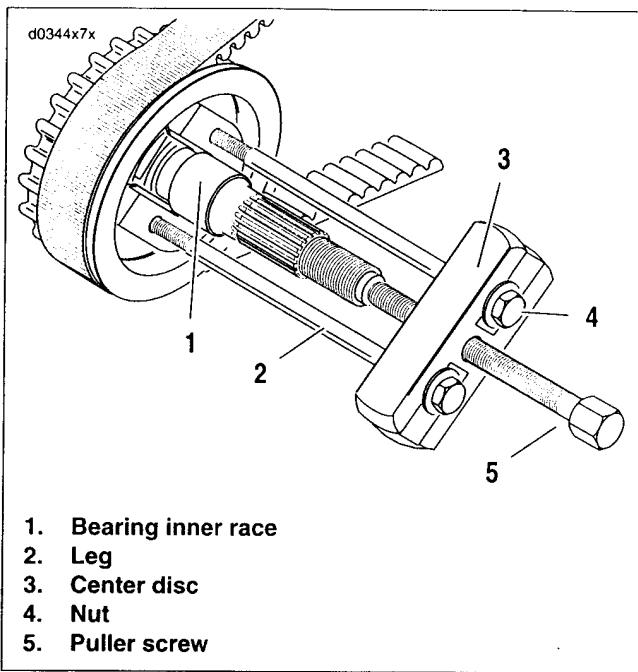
Pulling Mainshaft Inner Bearing Race
